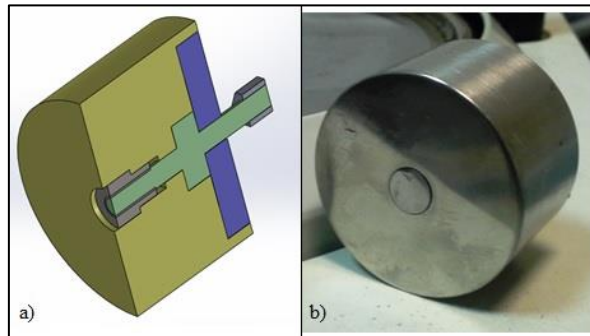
Specimen holder showing: a) sectional CAD drawing and b) photograph.
